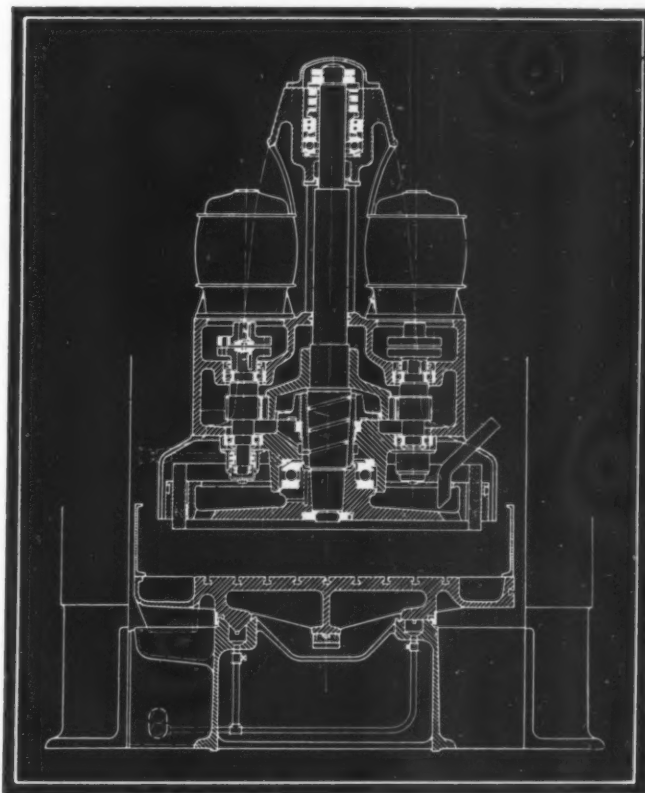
Two motors are employed for driving the grinding wheel on new surface grinder
